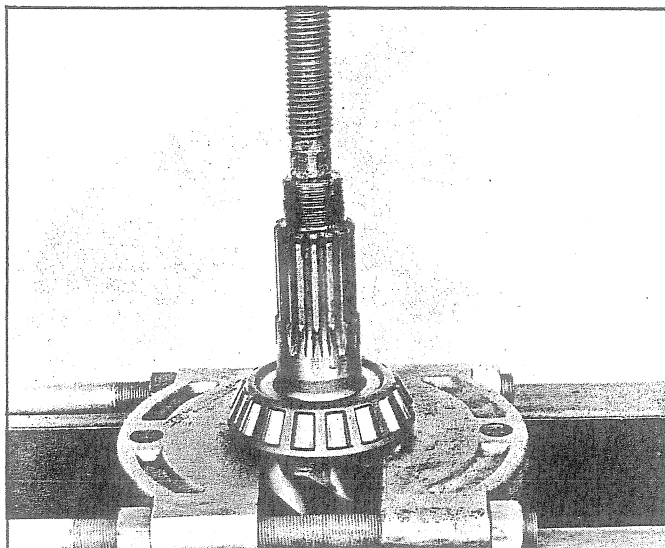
Pressing Center Bearing from Pinion Shaft
